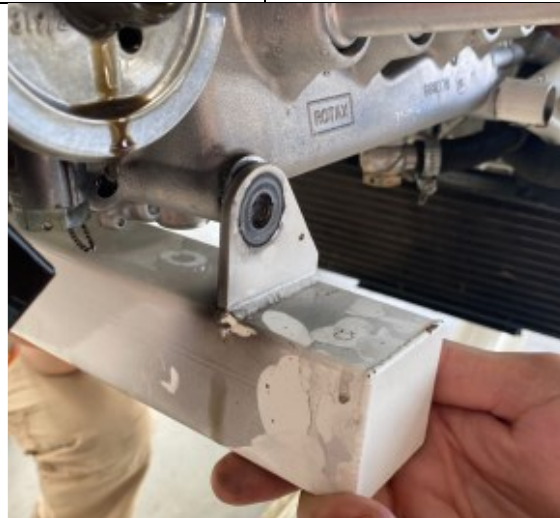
Grey dust on ballast indicating wear on bolt/thread/attachment); ballast 71B200201N issue C shown
